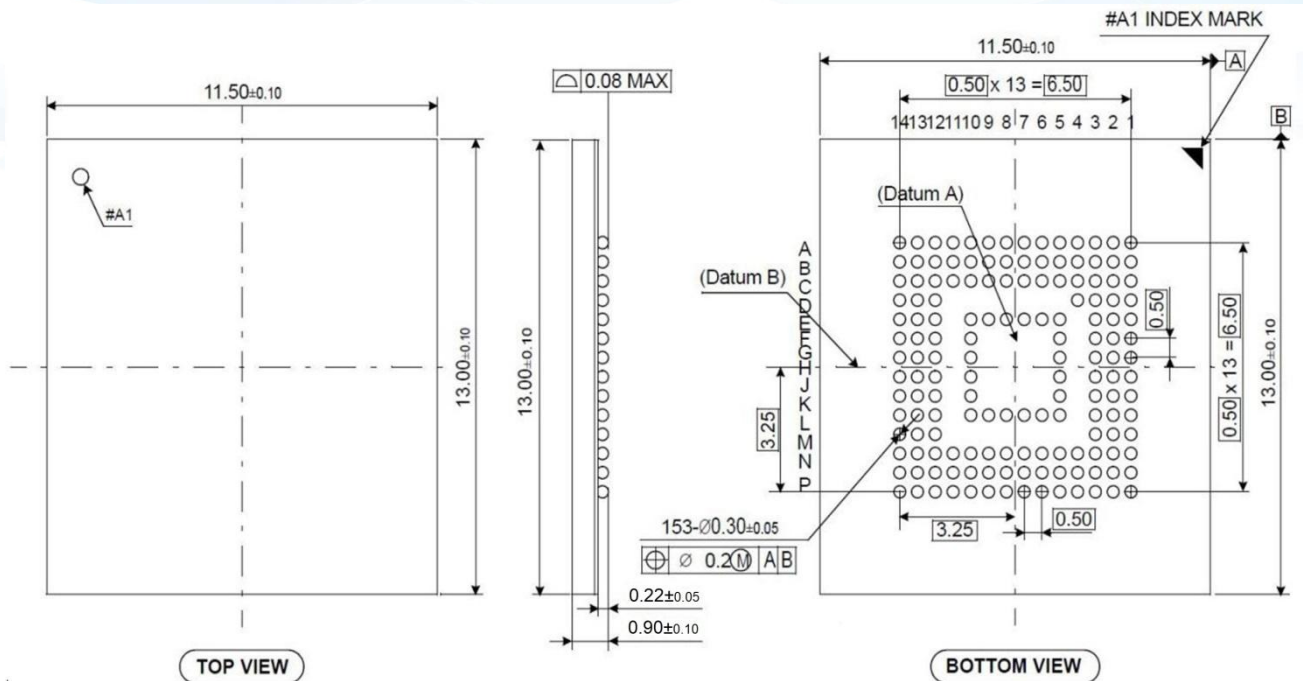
BGA 11.5x13x1.0mm Package Dimension
